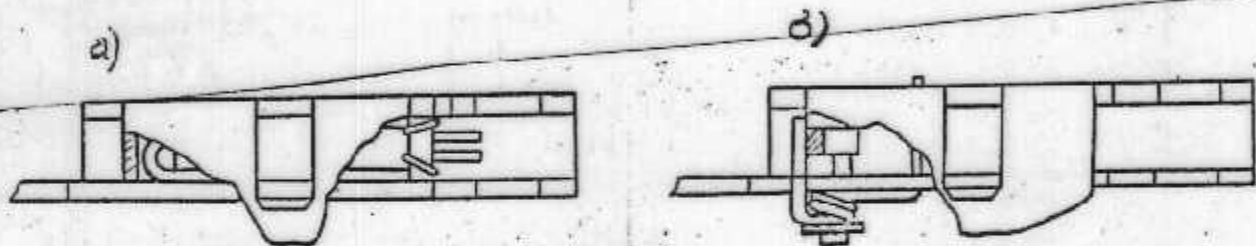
SLIDE BLOCK WITH COMPONENTS:-
